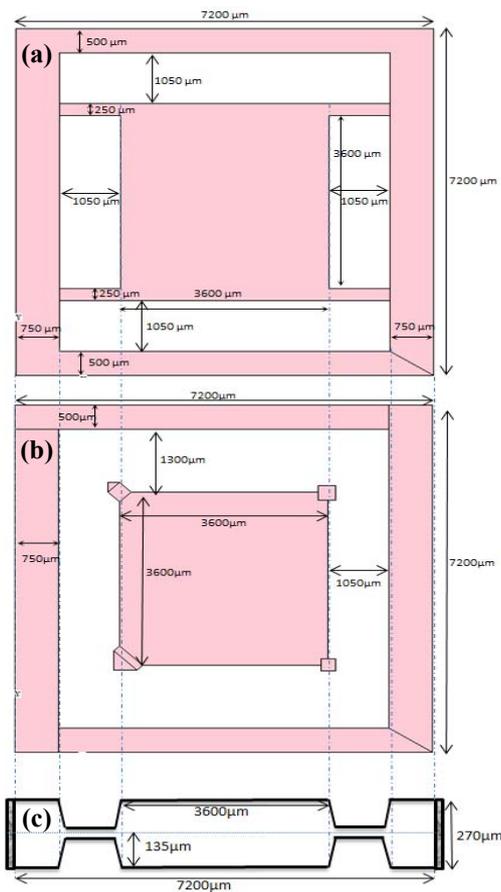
(a) Top mask (b) Bottom mask (c) cross section view of complete accelerometer structure
